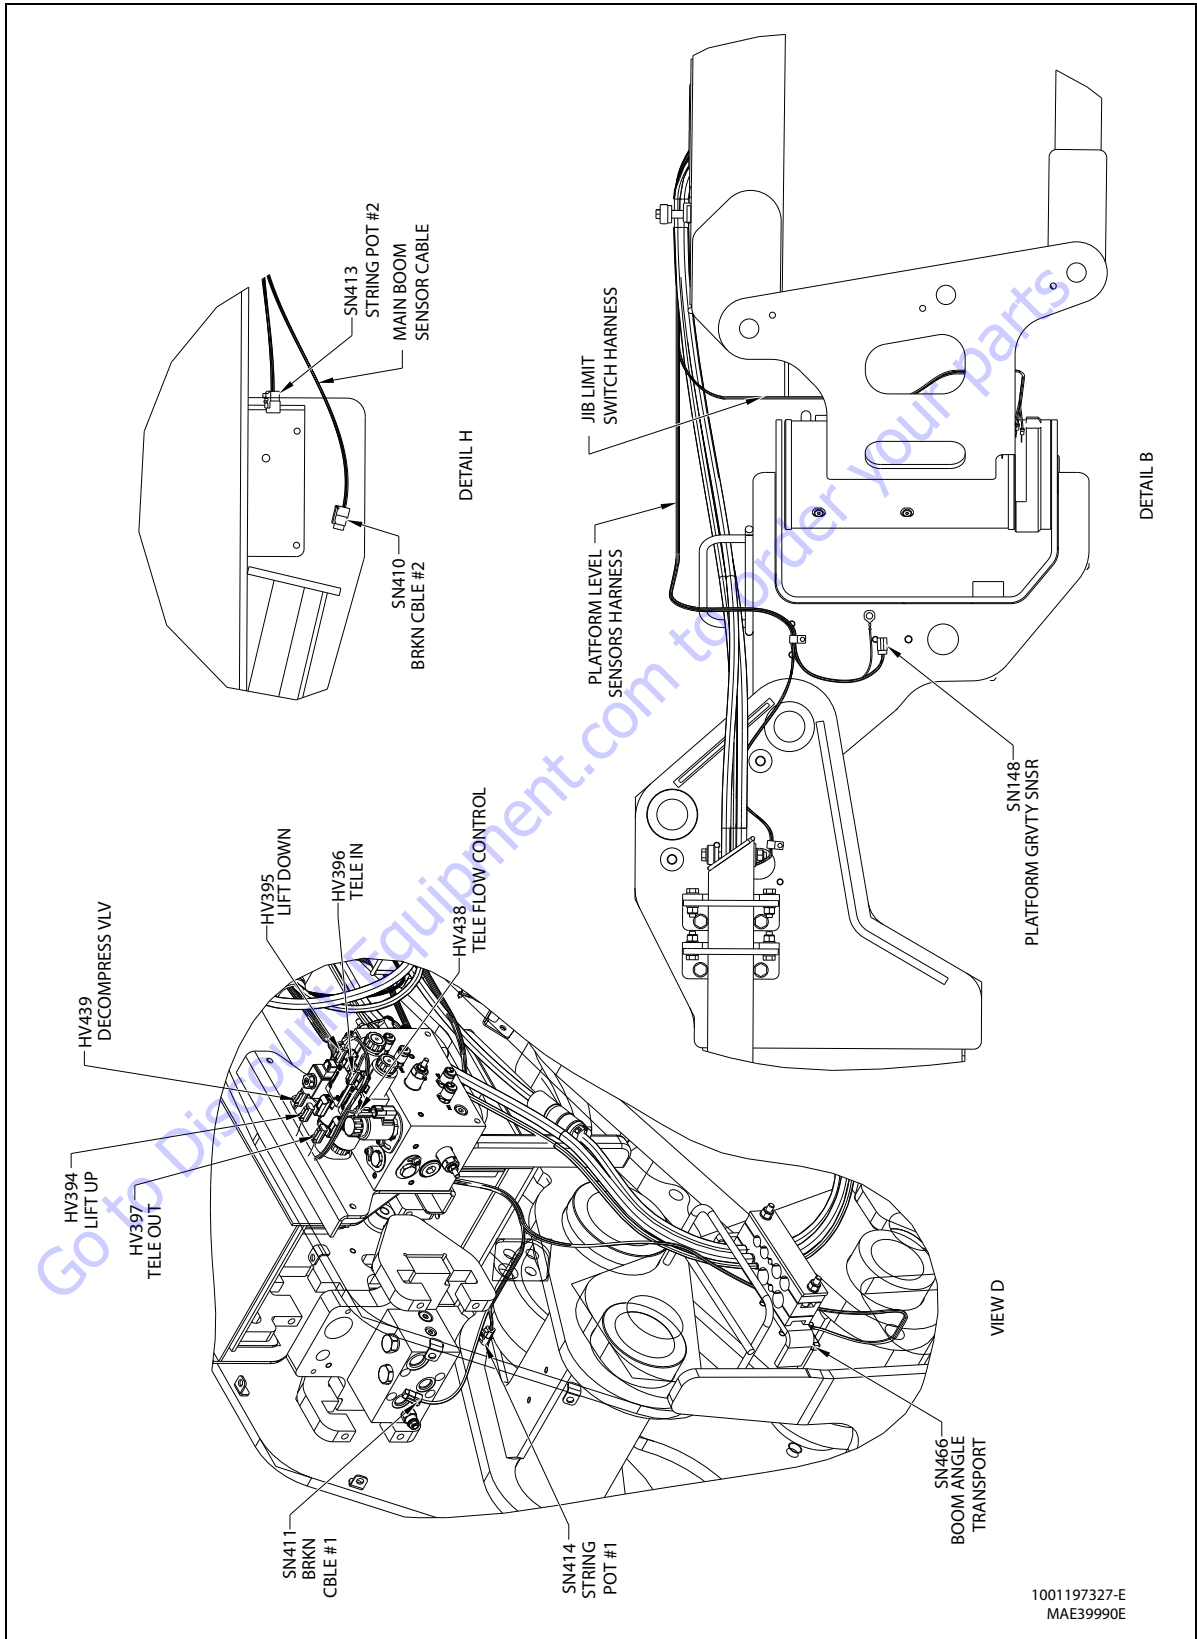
Boom Electrical Installation (CE) - Sheet 3 of 5
